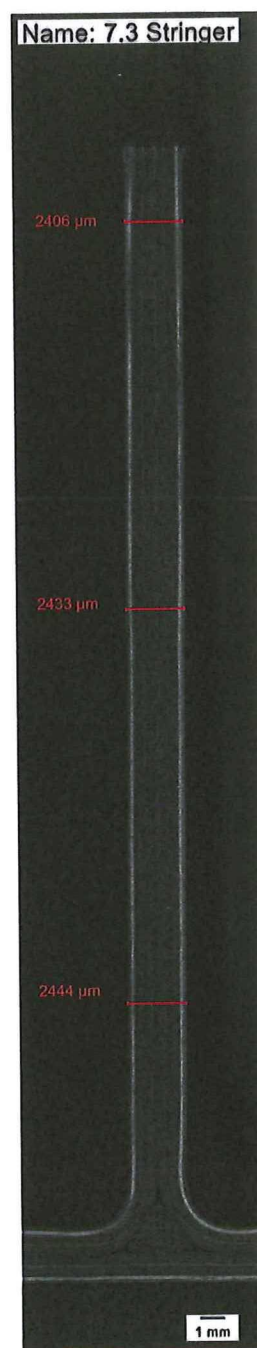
Cross section of panel 12 stringer 3 skin
